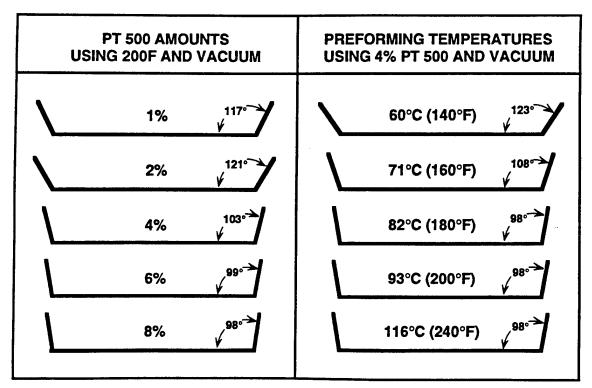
Optimum Processing Shown by 90° Integrity of Flange
